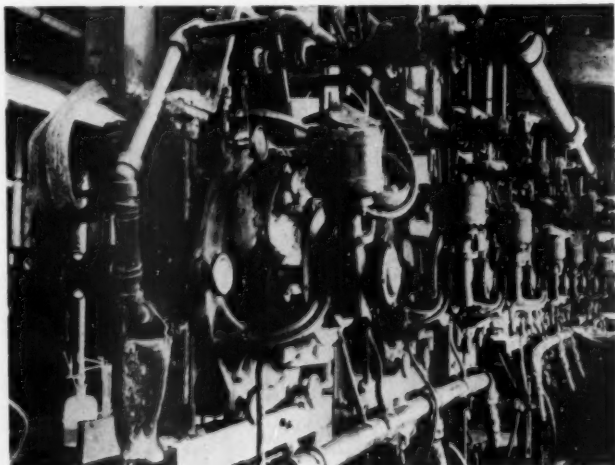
Back view of the high-speed plating machines. These motors rotate the solid copper anodes, while similar motors on the front of the machines rotate the master discs. Note the heavy braid leads necessary to carry the high plating current.
